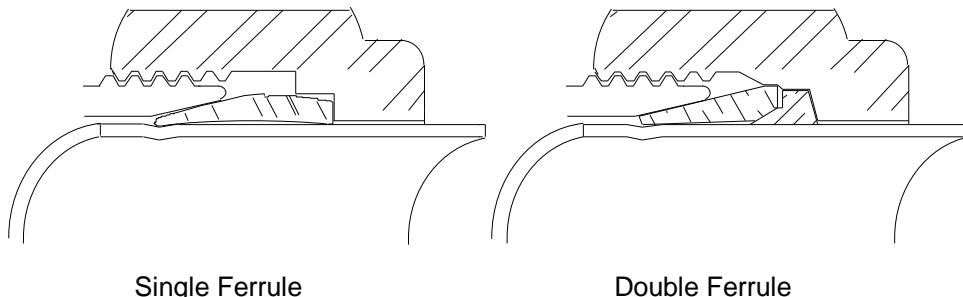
Metal Single and Double Ferrule Compression-type Vacuum Fittings
